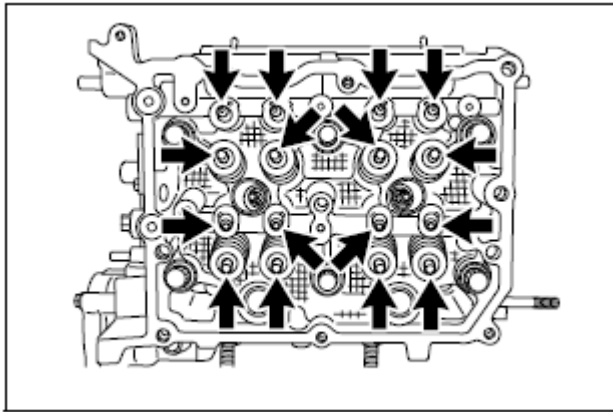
Identifying Valve Adjusting Shim And Roller Rocker Arm Pivot
